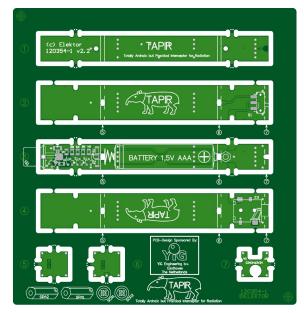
Top overlay of PCB Panel 120354-1 v2.2
